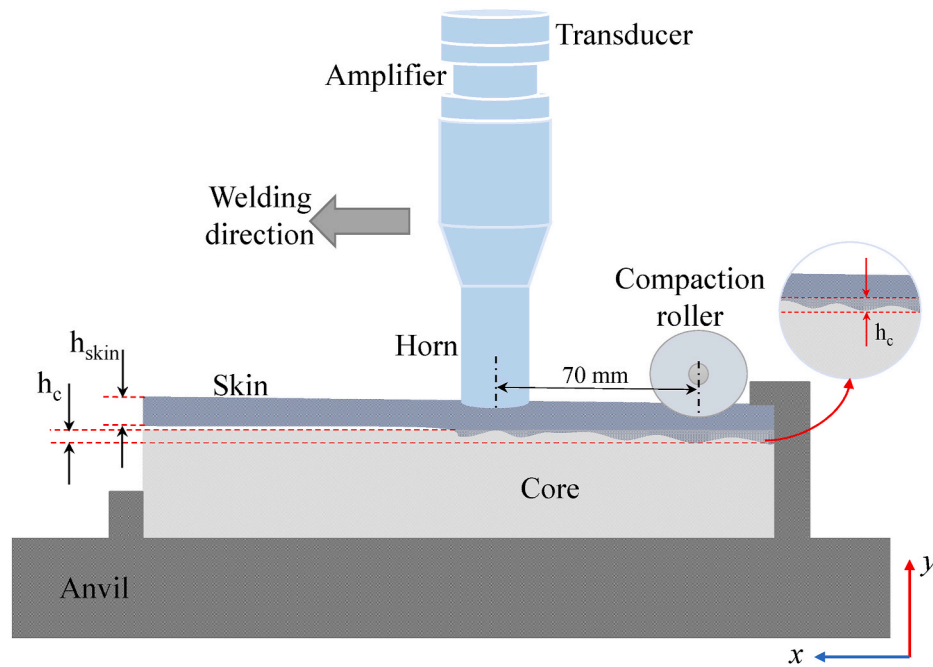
Diagram illustrating the skin/core welding setup utilising ultrasonic vibration.
